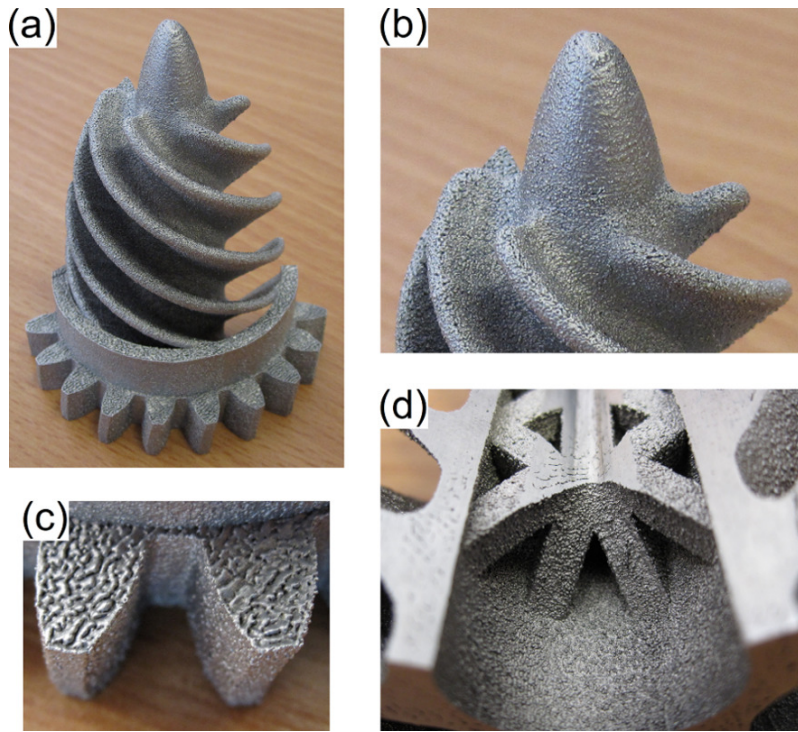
Photographs of demonstration part after removal from base plate and bead blasting: (a) advanced geometry, gear and bearing surface; (b) close up of top; (c) surfaces parallel to the base plate; (d) internal surfaces, with polished surfaces visible.
